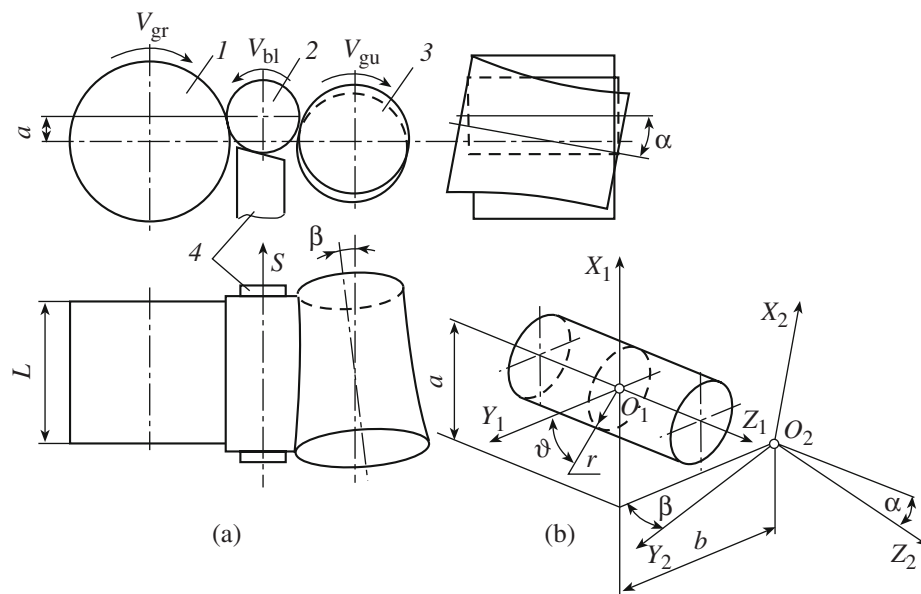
Centerless grinding (a) and guide-wheel configuration in machining cylindrical surfaces (b).
